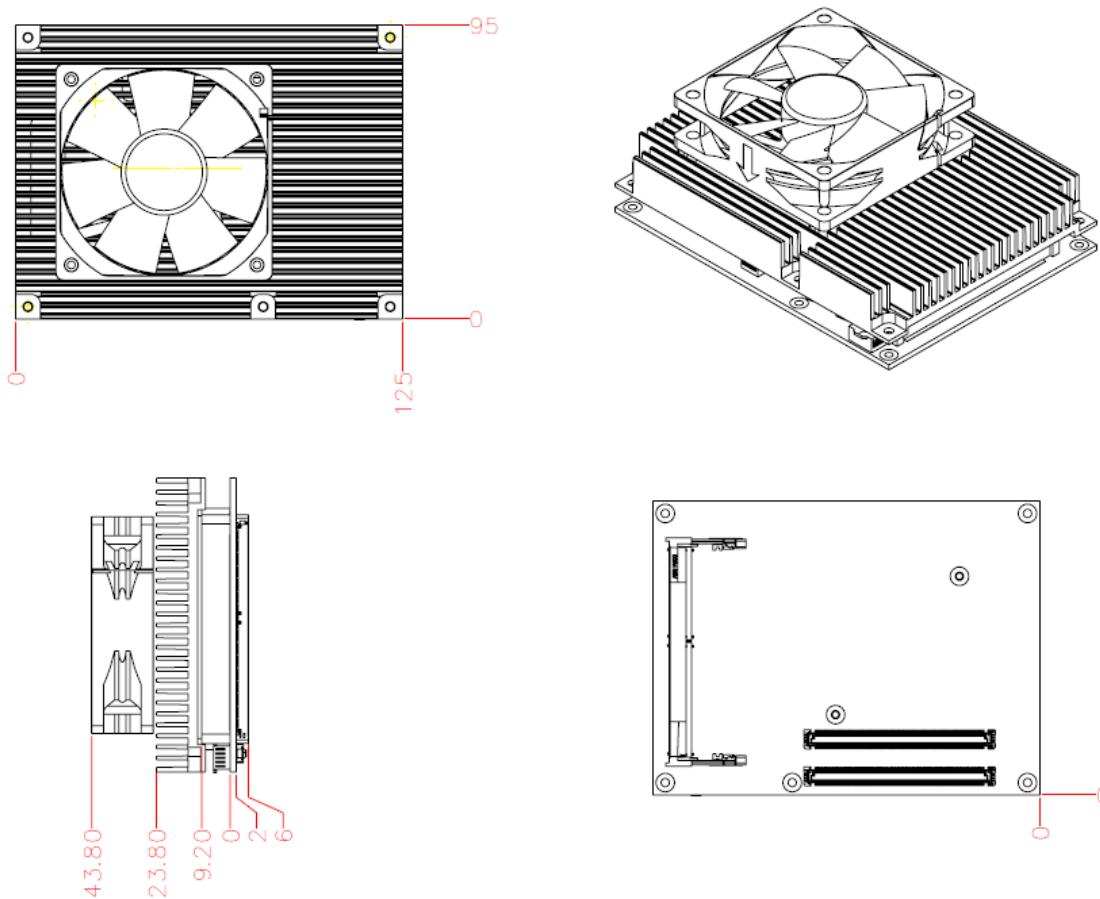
PCOM-B700G-NS side view dimension, along with a heat sink / cooler.
